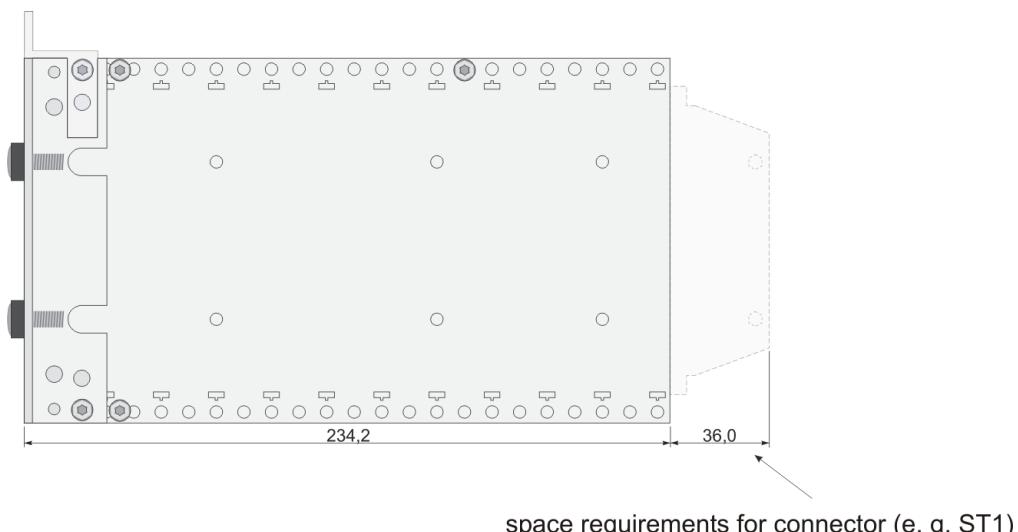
Lateral view of the board rack, type BGT05, with label bar (identical to BGT04)
